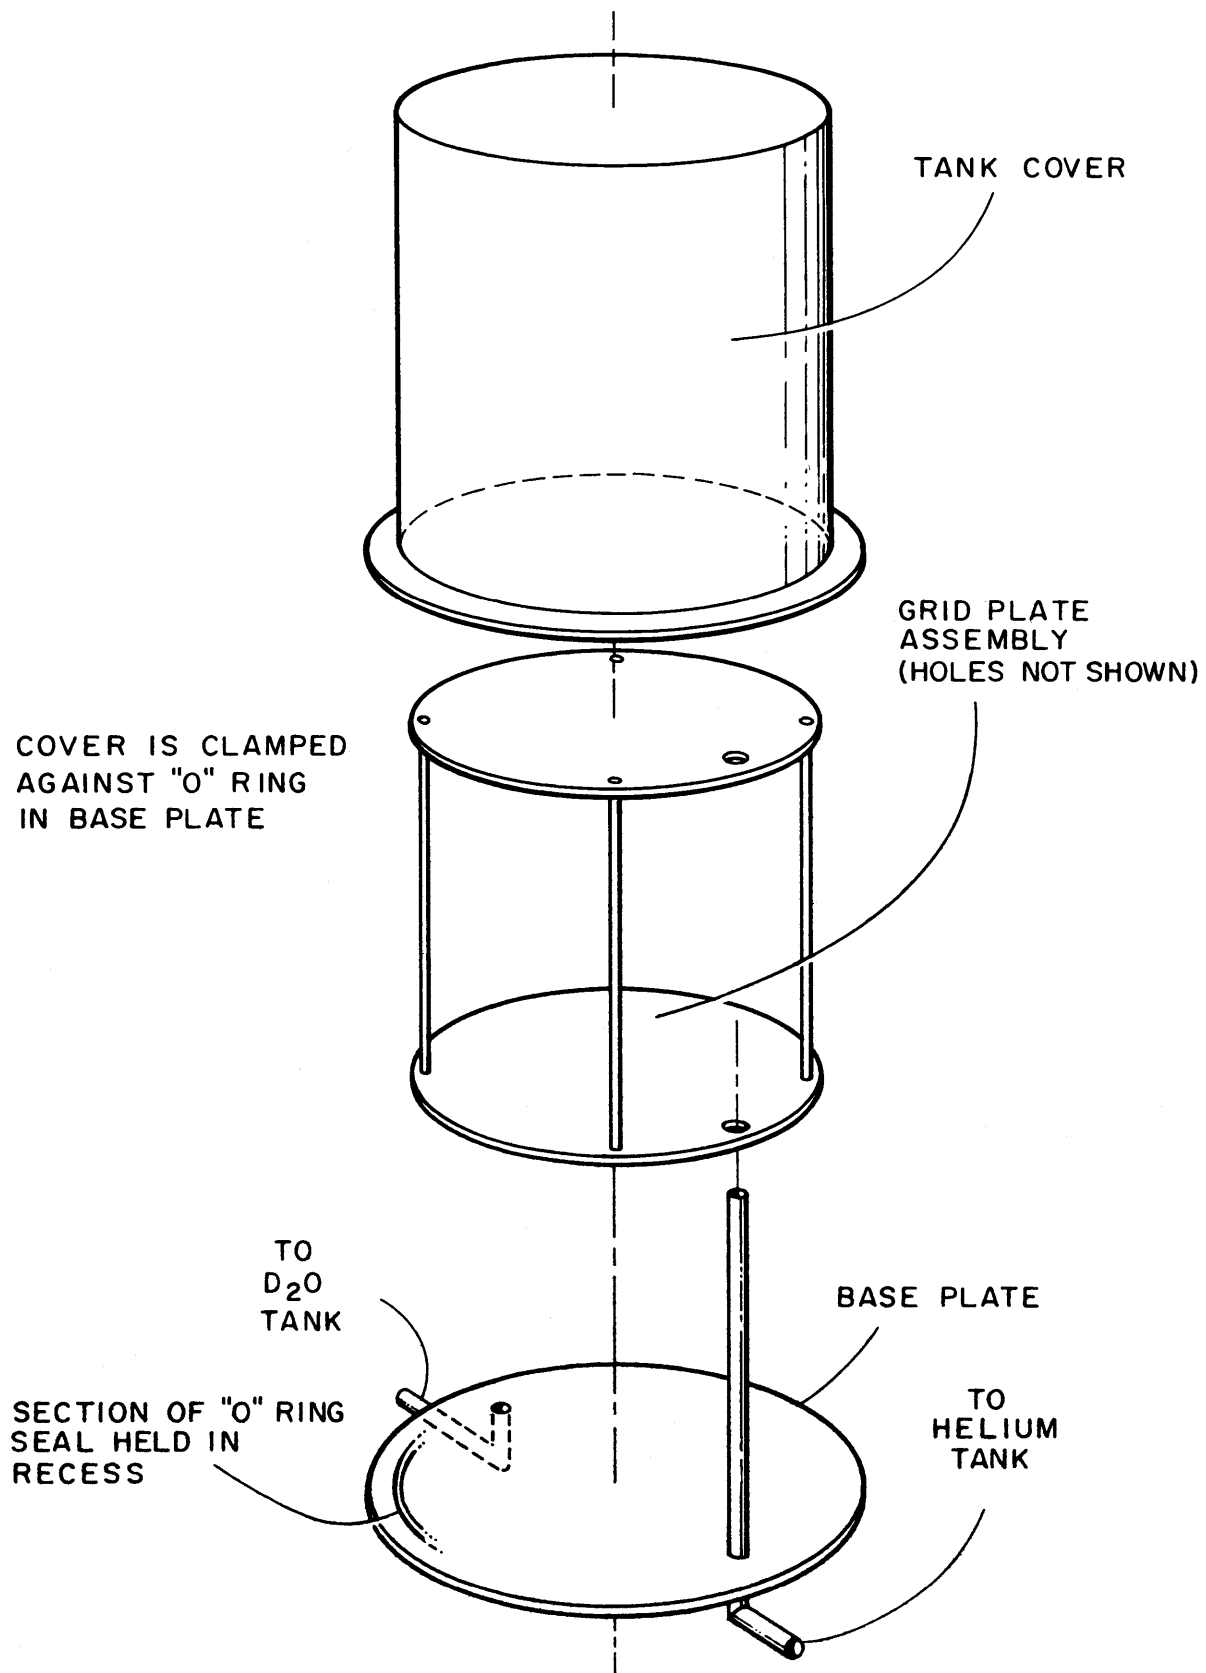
SMALL EXPONENTIAL ASSEMBLY
